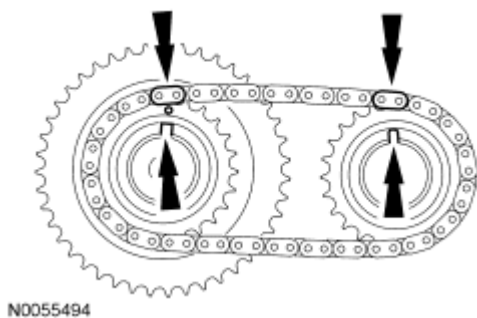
Aligning RH Exhaust Camshaft Sprocket & RH Secondary Timing Chain Colored Links
